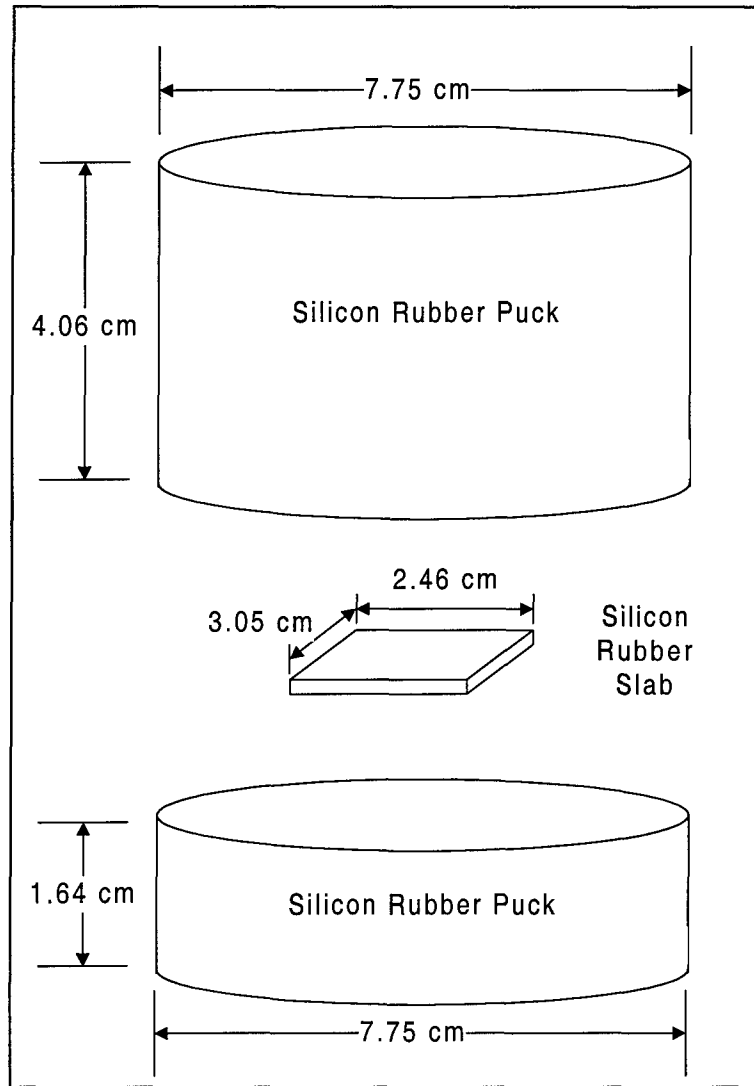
Exploded View of Silicon Rubber Puck Measurements. Test signal directed from either the top or the bottom of the stacked-puck target.
